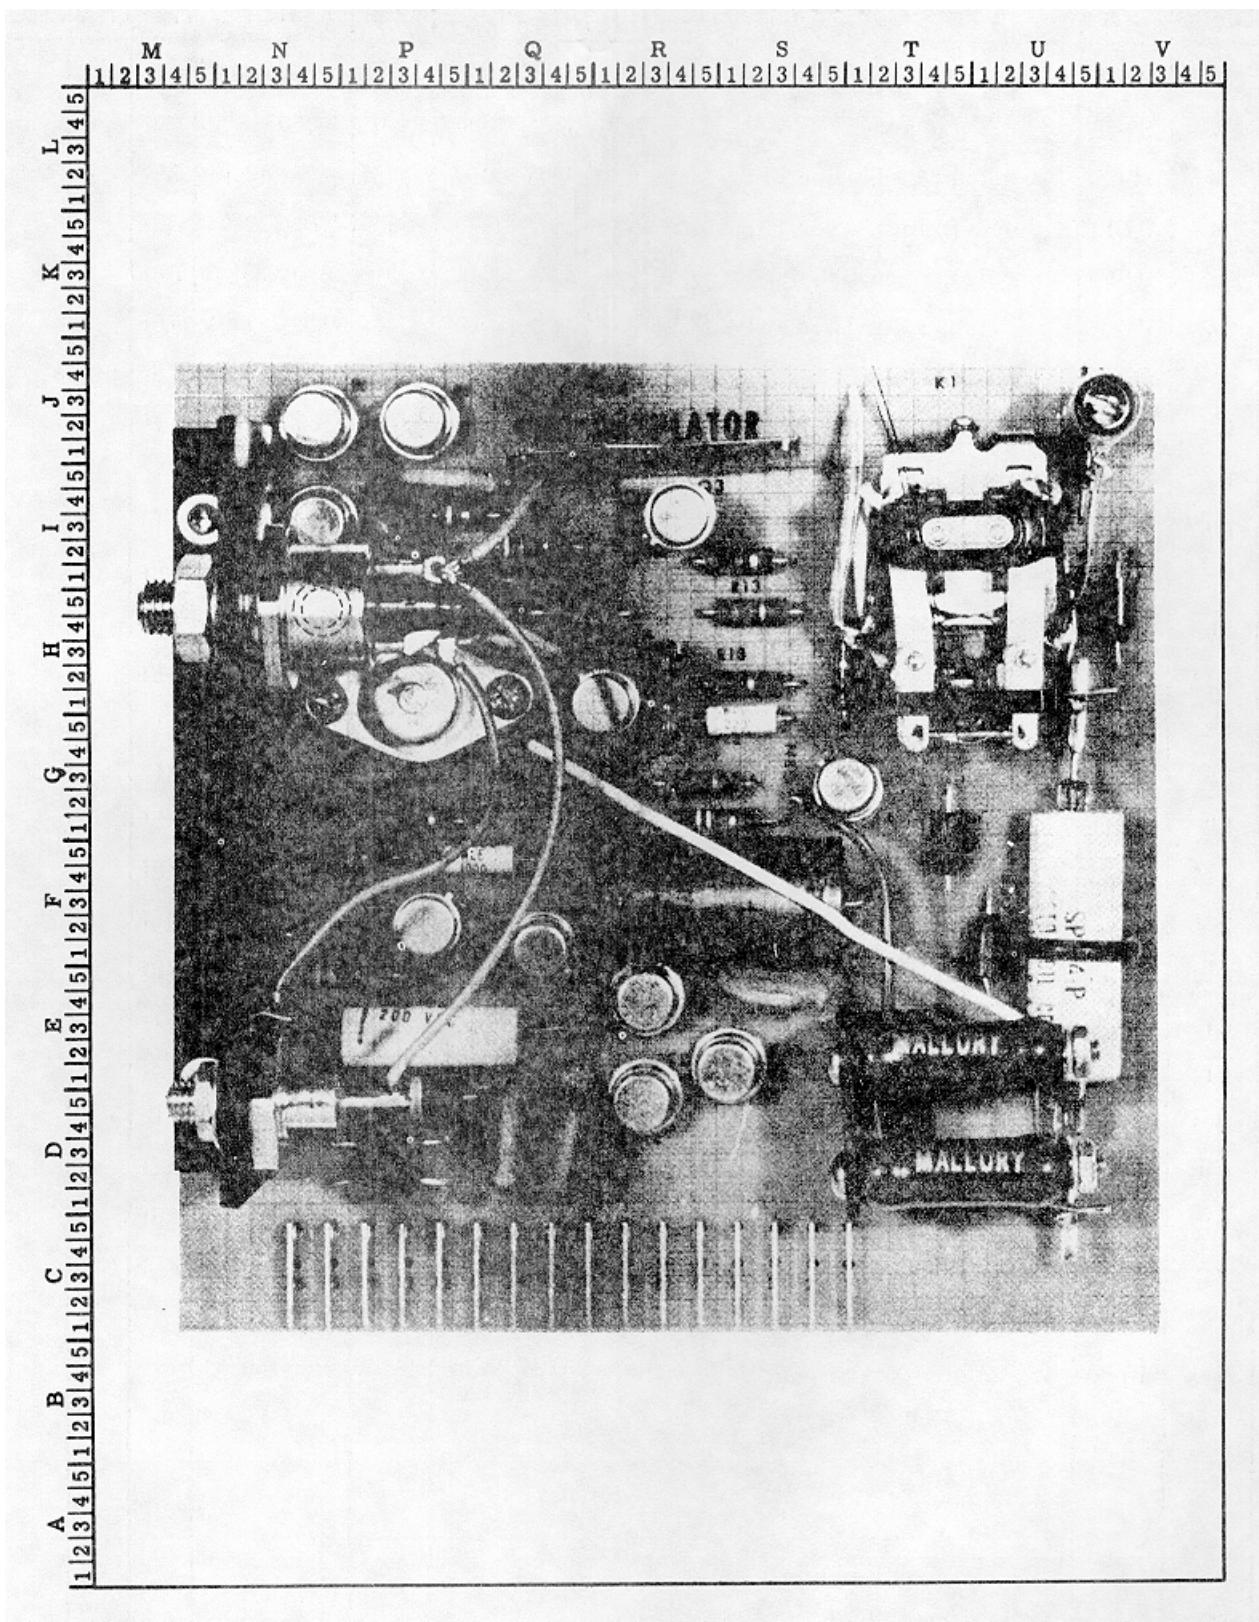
PREREGULATOR P/C ASSEMBLY
